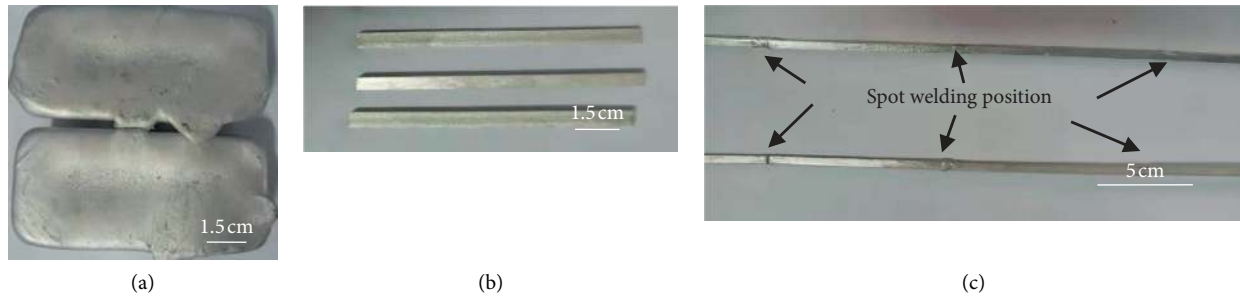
Preparation of welding wires. (a) The aluminum ingots. (b) Welding wires before spot welding. (c) Welding wires after spot welding.
